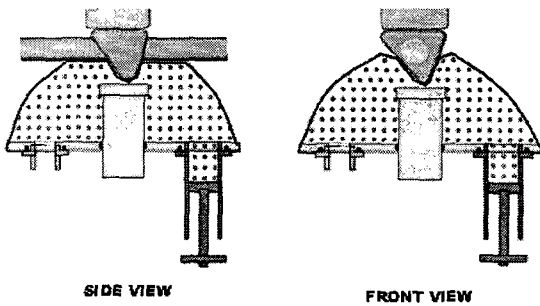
Schematic drawing of punch, workpiece and the proposed flexible fixture
